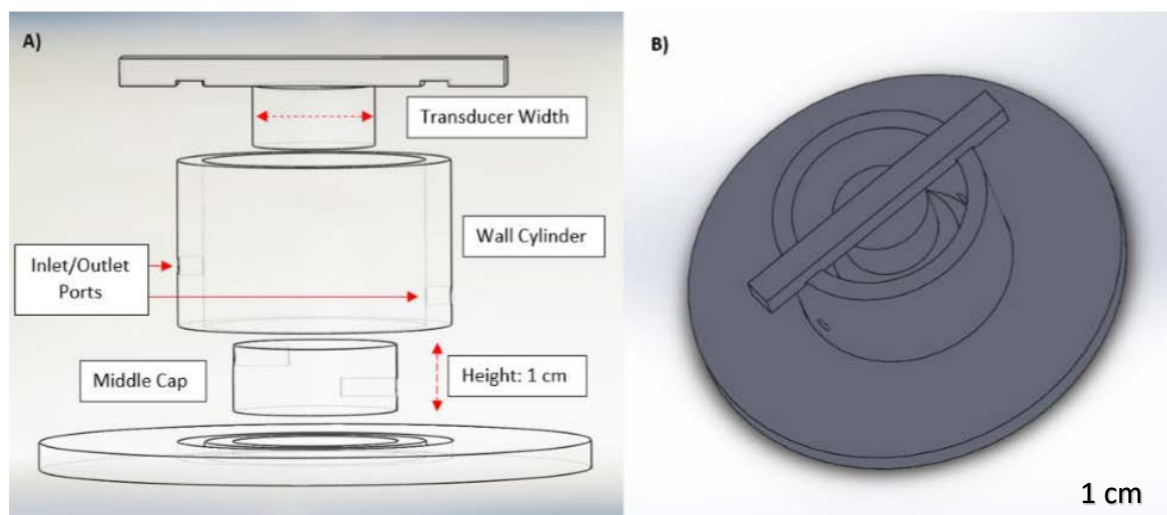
Printed negative mould for coupon. A) Exploded view of the individual pieces of the coupon mould showing the main components in the design. The ports were used as inlet and outlet for the fluid, the middle cap controlled the height of the treatment area, the wall cylinder determined the diameter of the coupon and the top plunger created a slot for the transducer. B) The full assembly of the four components
